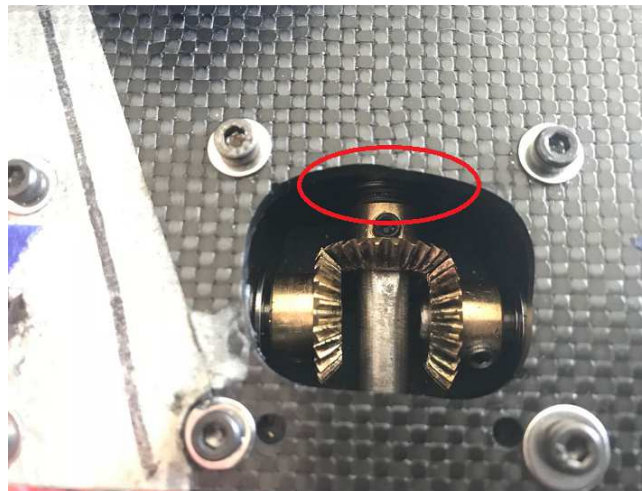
13: 8x10x0.25 mm-shims are added to the gearbox for transferring the axial load to the bearing.
